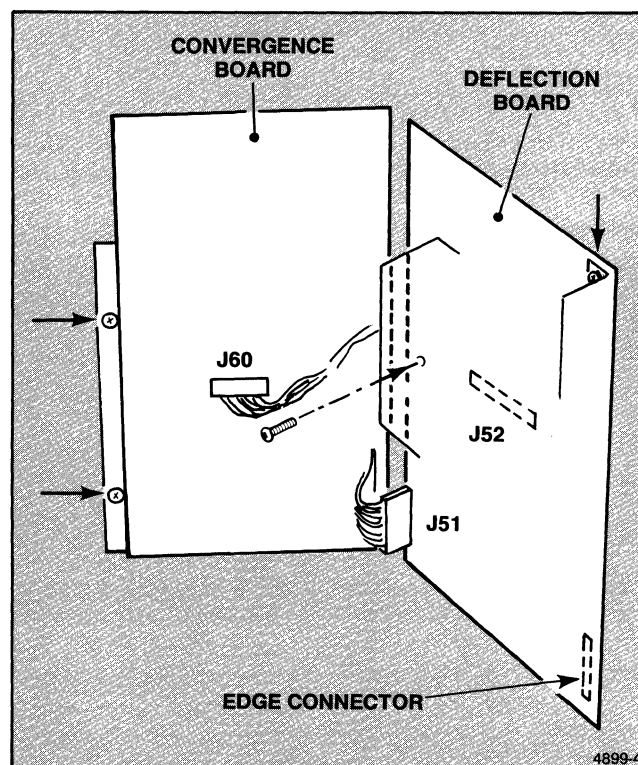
Convergence Board and Deflection Board Mounting Screws and Connectors.
